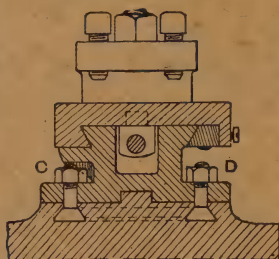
Cross Section Showing V-bolts for Swivelling
